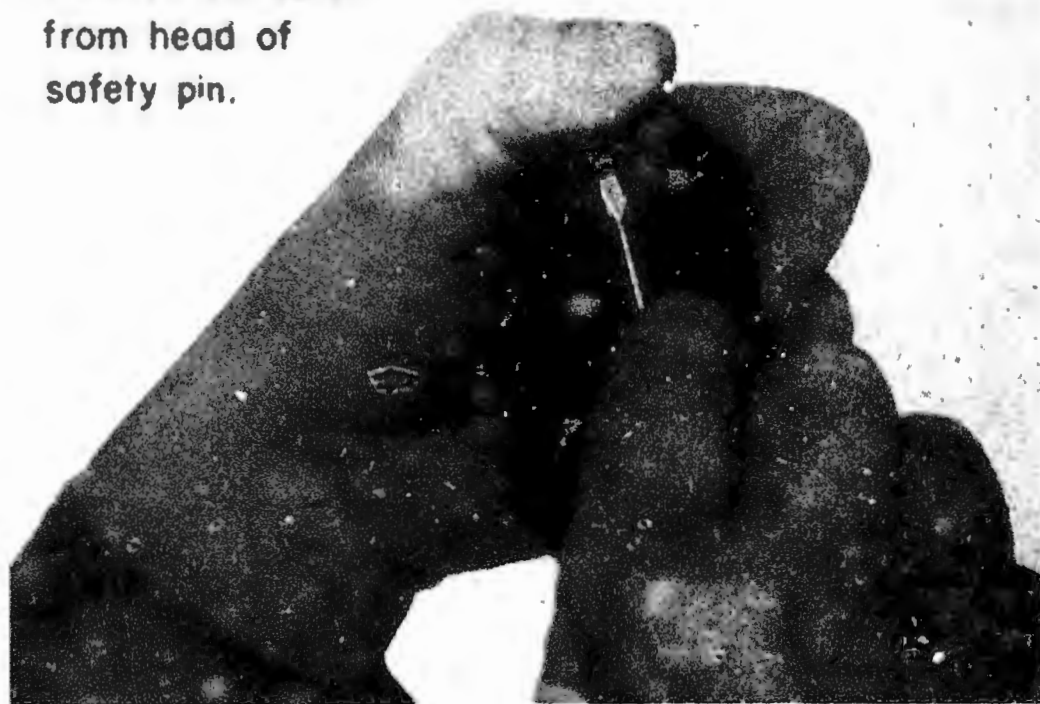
Third steps in disassembly of DP, R Link, Mark II or No. U S. 240.
